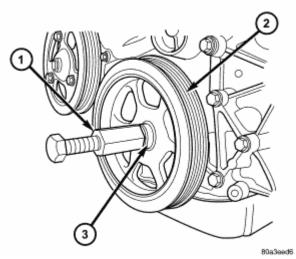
Crankshaft Damper Courtesy of CHRYSLER LLC
